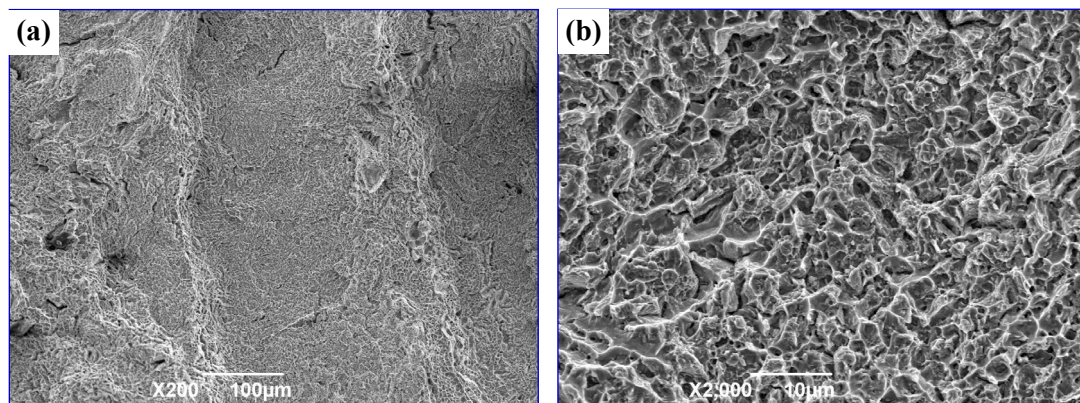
Fracture appearances of joints; (a) Fracture appearances (low magnification) (b) Fracture appearances (high magnification)
